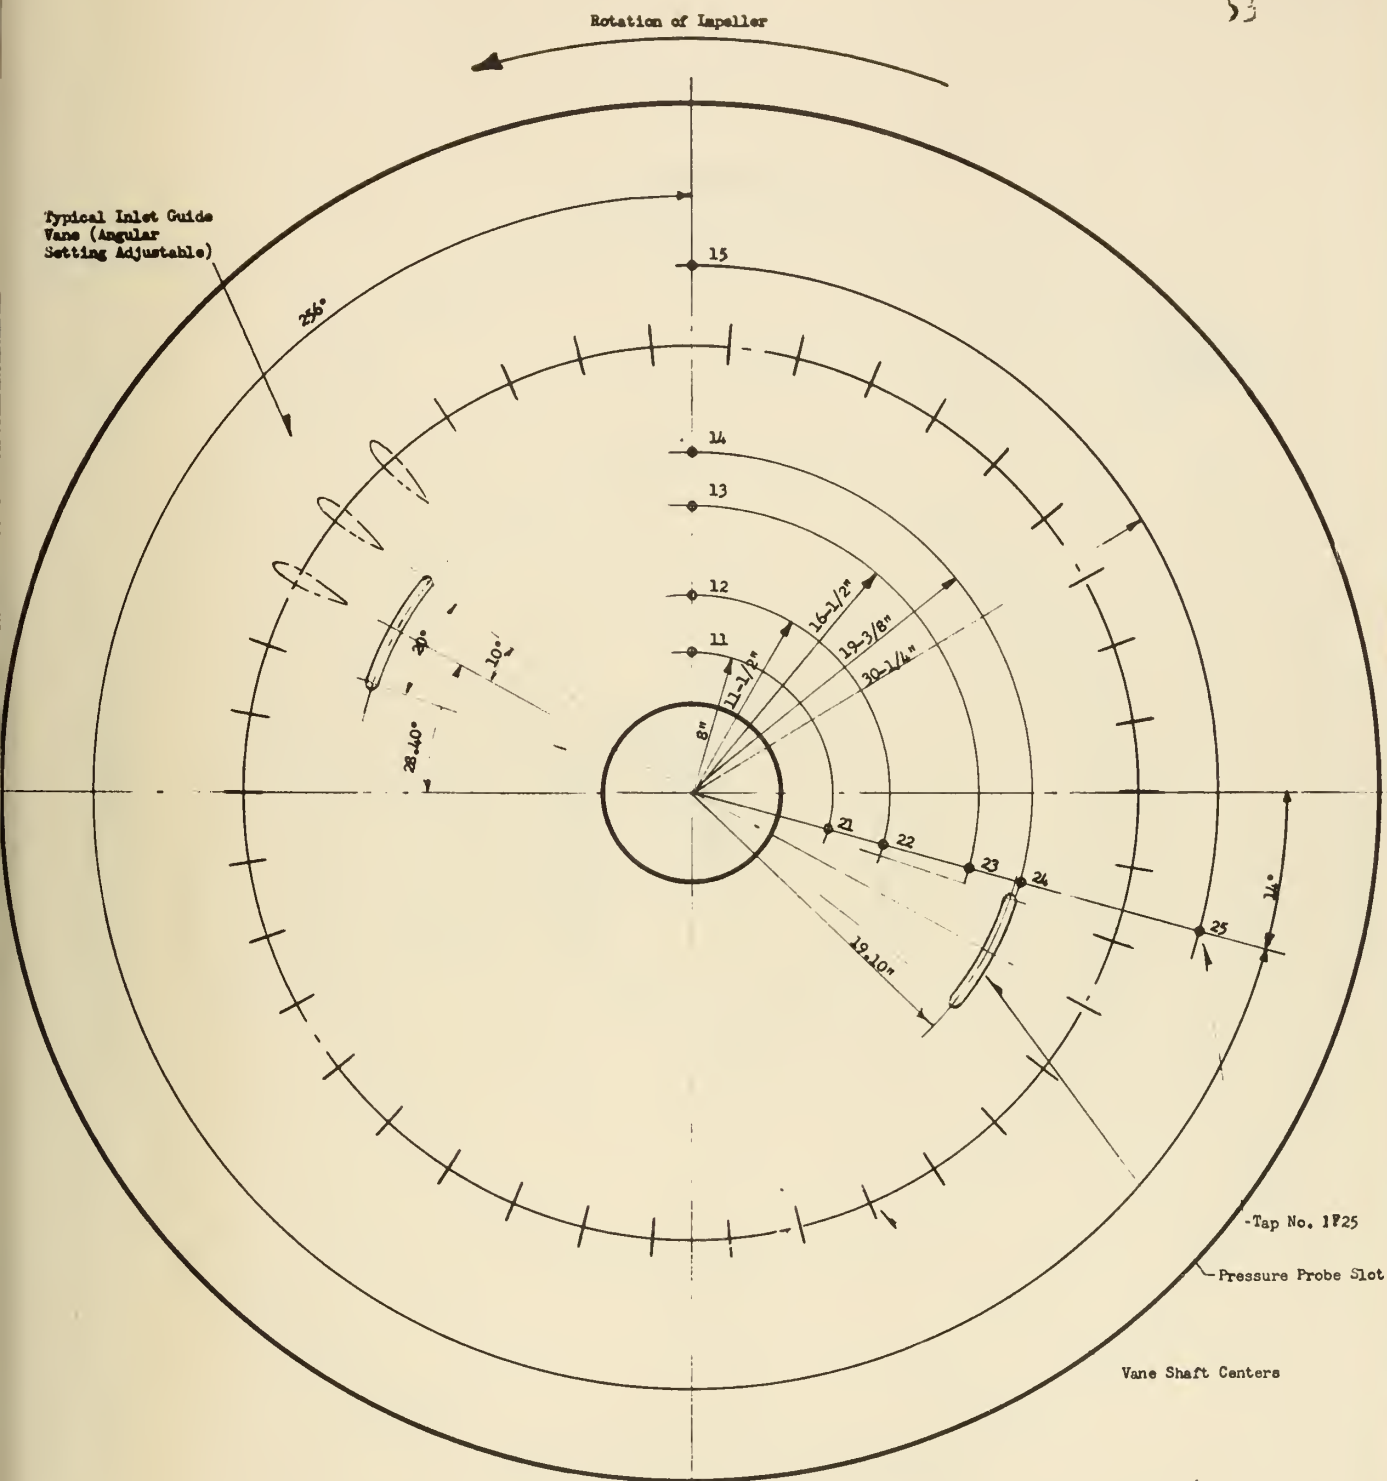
WALL PRESSURE TAPS AT FRAME NO. 1
